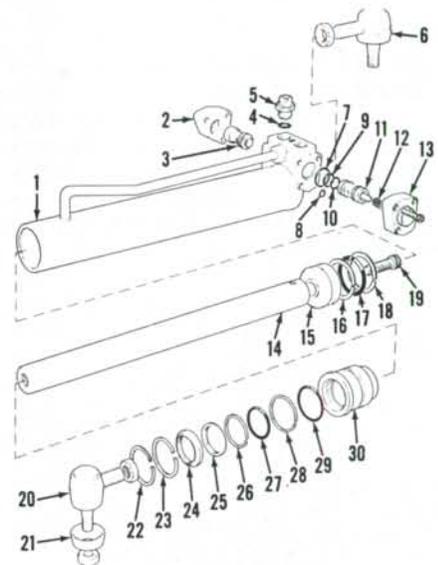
Exploded view of typical side mounted steering cylinder used on some two-wheel drive tractors.
